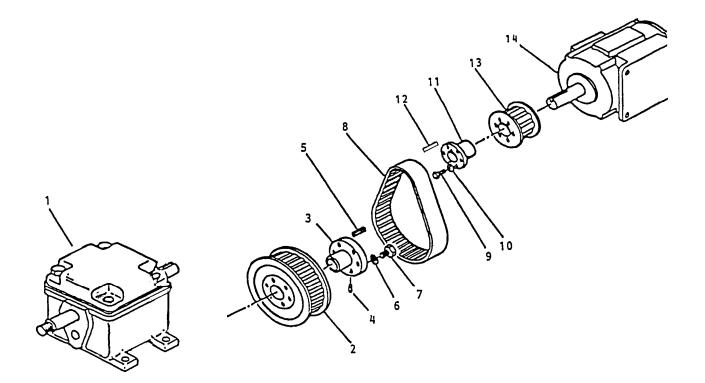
MOTOR AND POWER TRAIN ASSEMBLY
